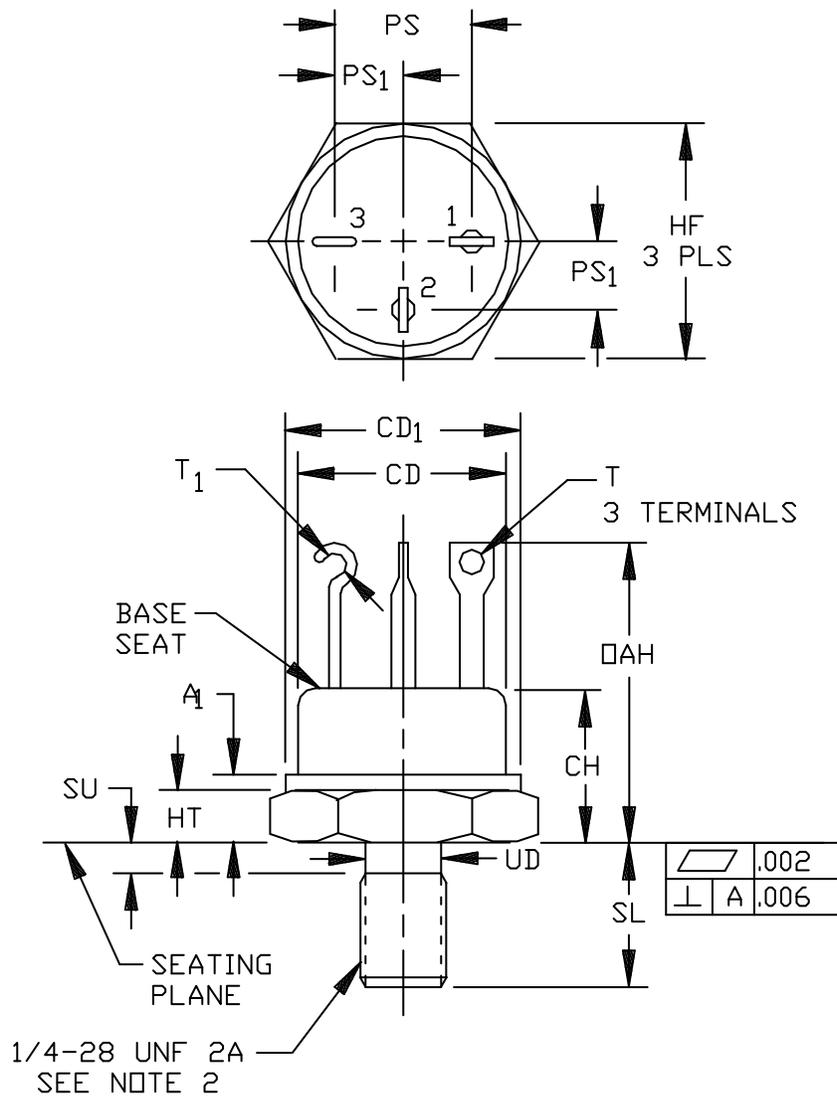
Physical dimensions (TO-210AC, formerly TO-61).
